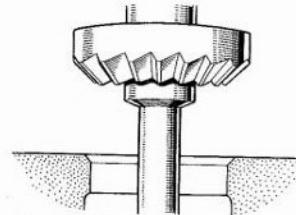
Churchill 45° Valve Seat Cutter Tool
